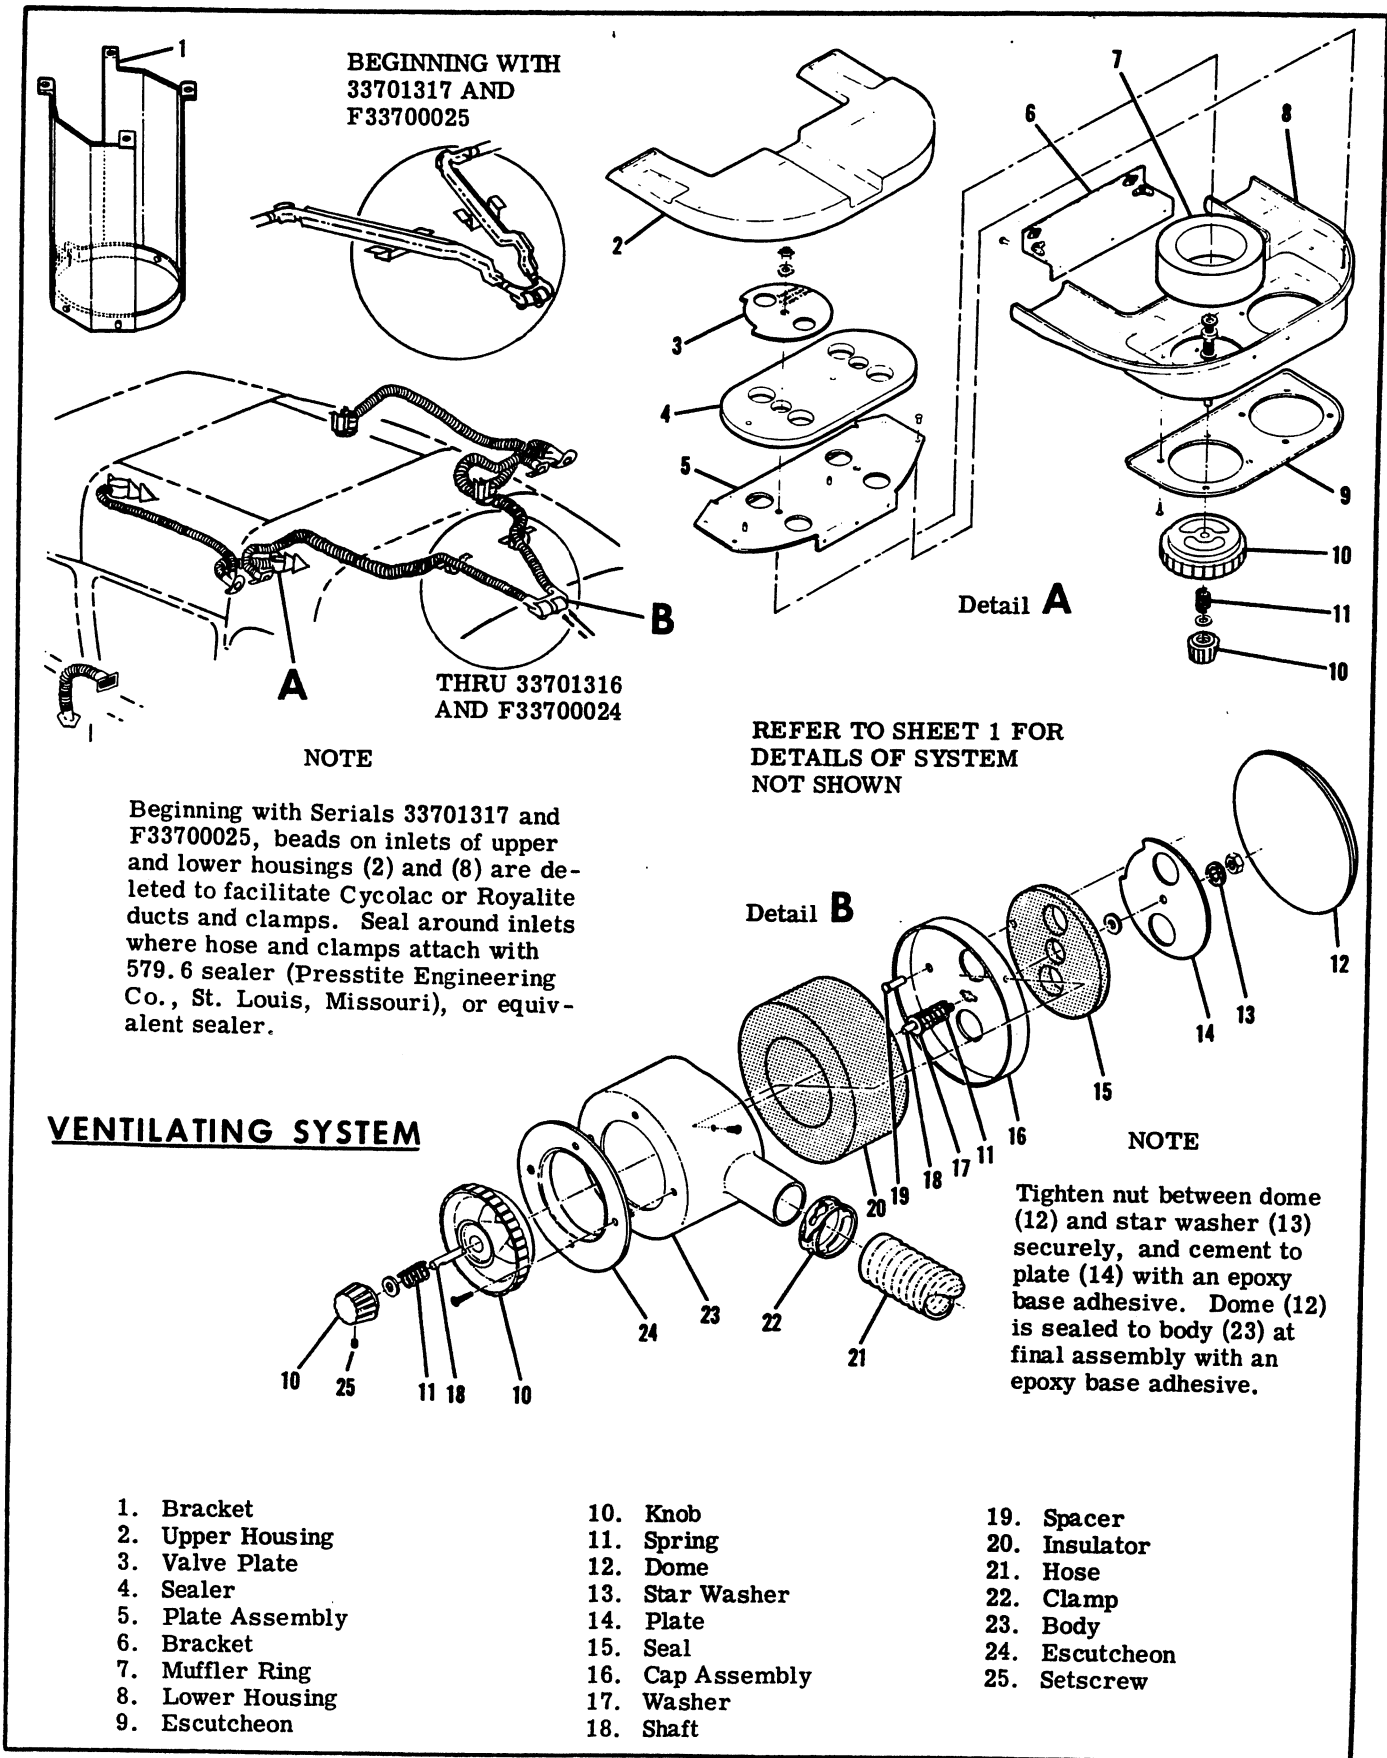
Heating, Ventilating and Defrosting Systems (Sheet 6 of 7.)
